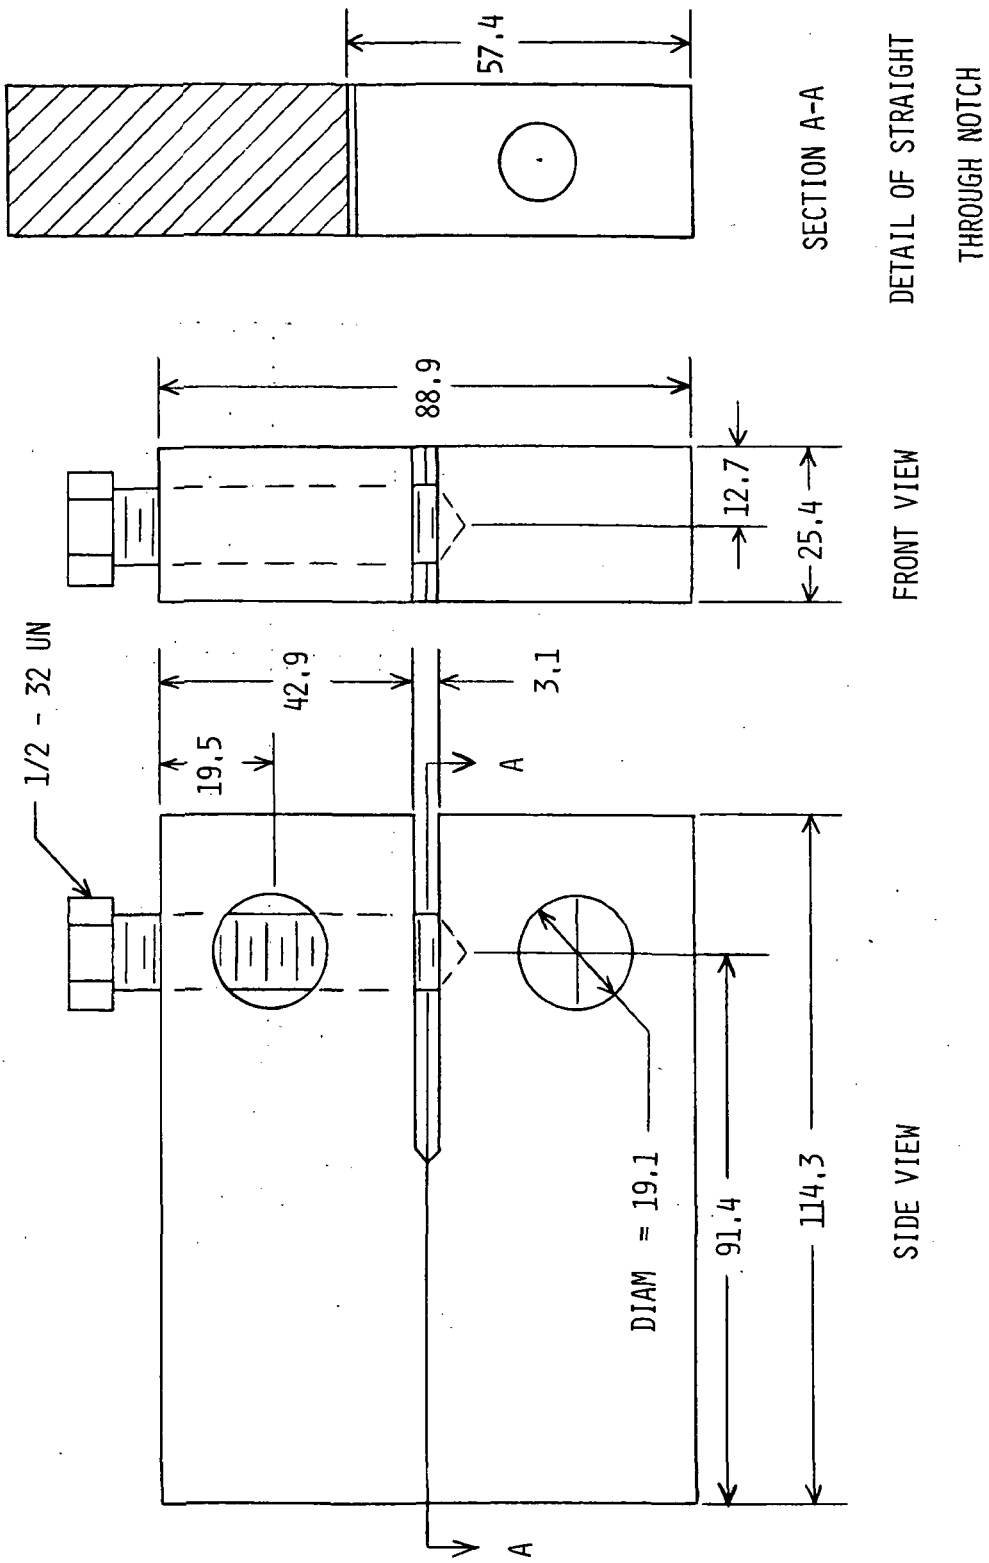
Compact specimen configuration. All dimensions in mm. Specimen width, 63.5 mm.
